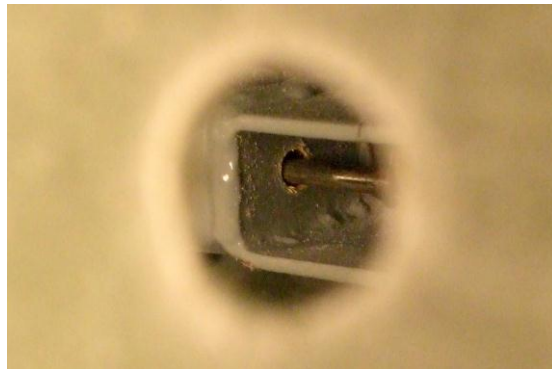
Inspection of elevator control rod - lock elevator control lever
